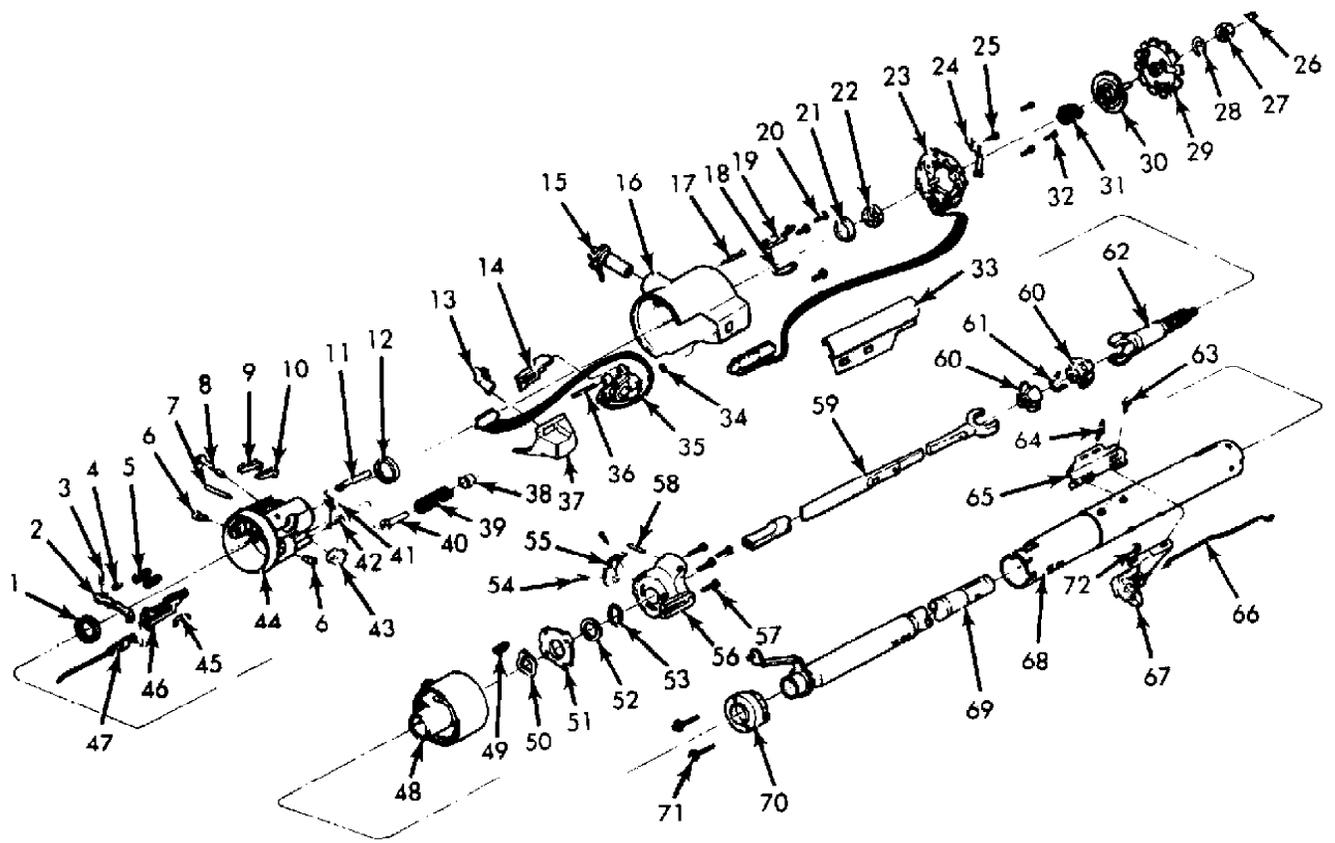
Exploded View of Floor Shift Steering Column Assembly
